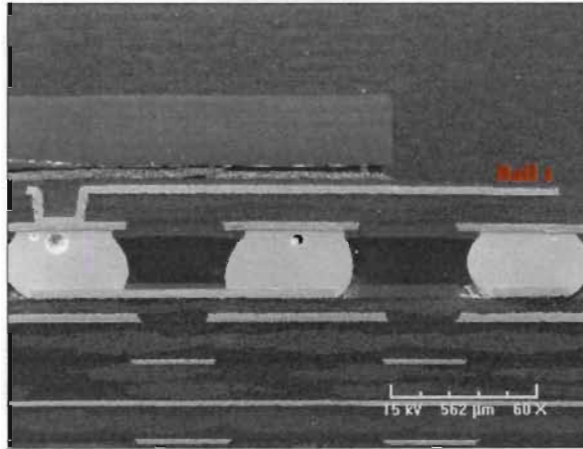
SEM image of cross-sectioned solder joints after assembly
